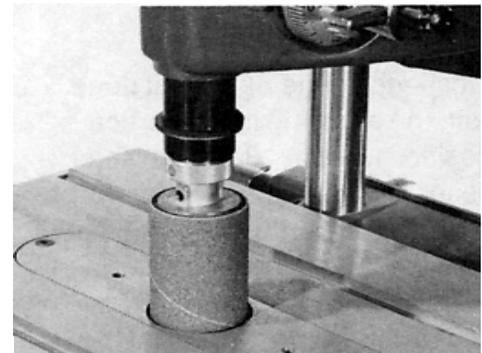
The drum sander is used with the drum sander/shaper insert. Model 500 is shown.
